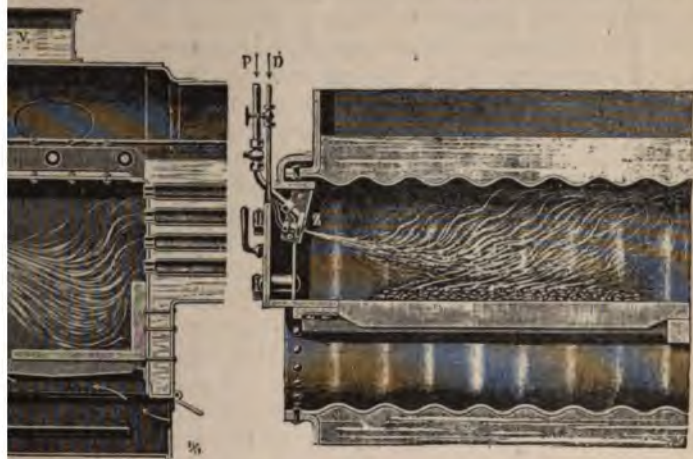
Sectional Drawings of Holden's Apparatus for Burning Liquid Fuel, as applied to a Lancashire Boiler.
